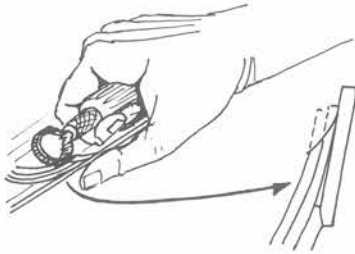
Cutting the heads of the frames with an Xacto #5 knife handle and router blade.
